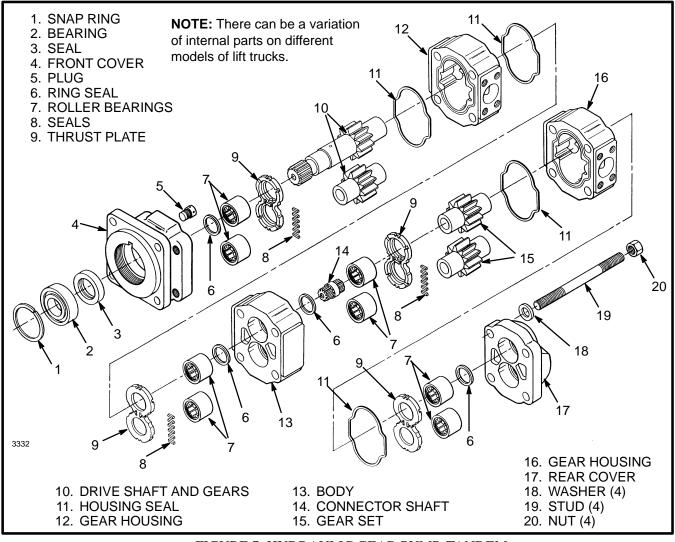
HYDRAULIC GEAR PUMP, TANDEM
